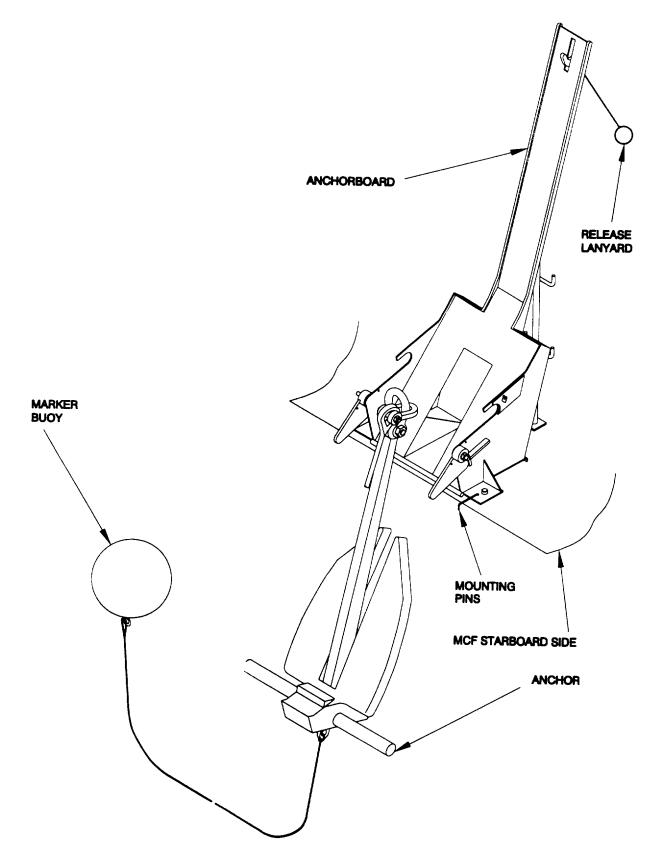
Propulsion Module Powered Section Assembly (Anchorboard Assembly - View G). (Sheet 9 of 11)
